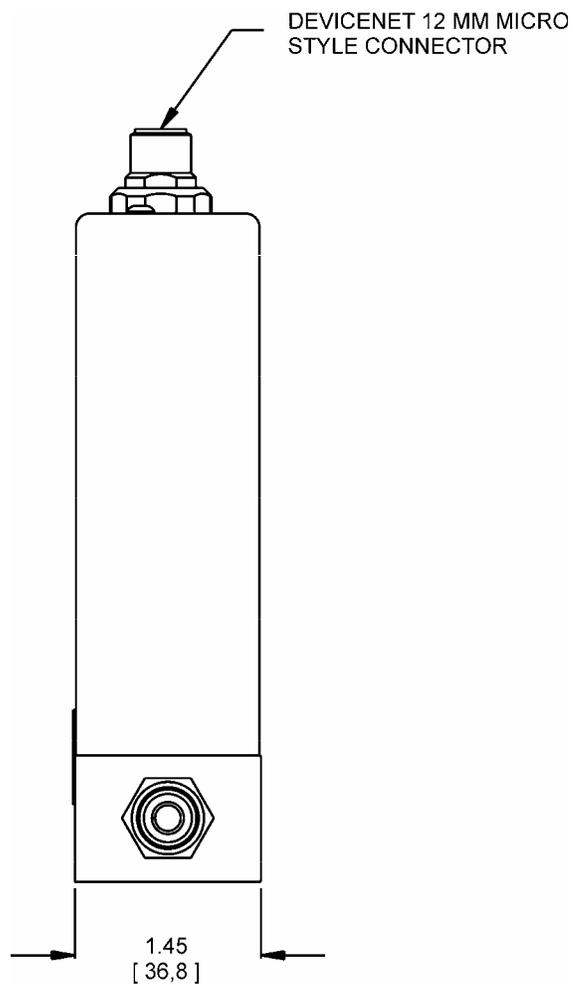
Side View of the MKS ALTA Mass Flow Devices (Welded Fittings)
